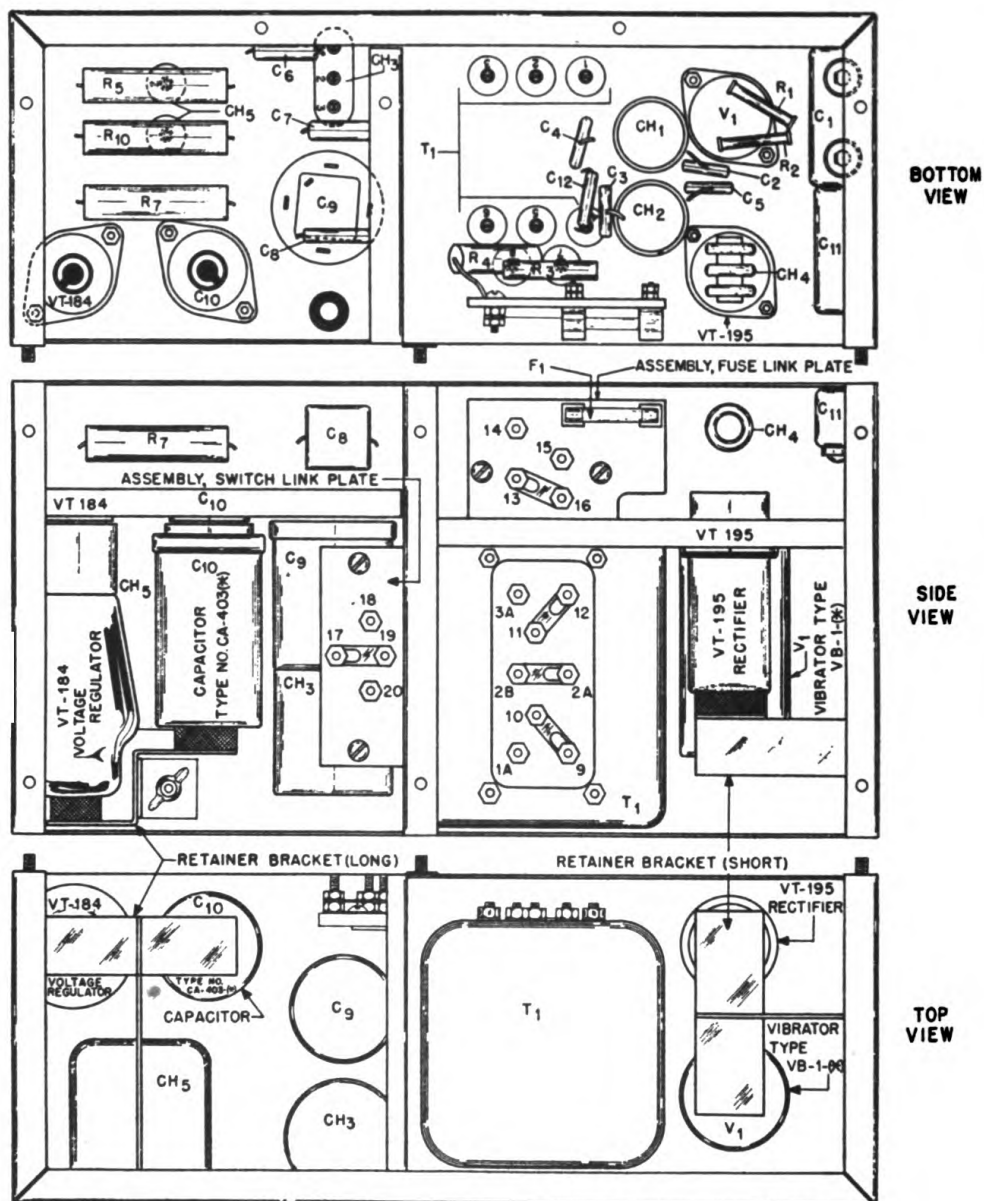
Plate Supply Unit PE-97-(\*), Parts Location Detail
